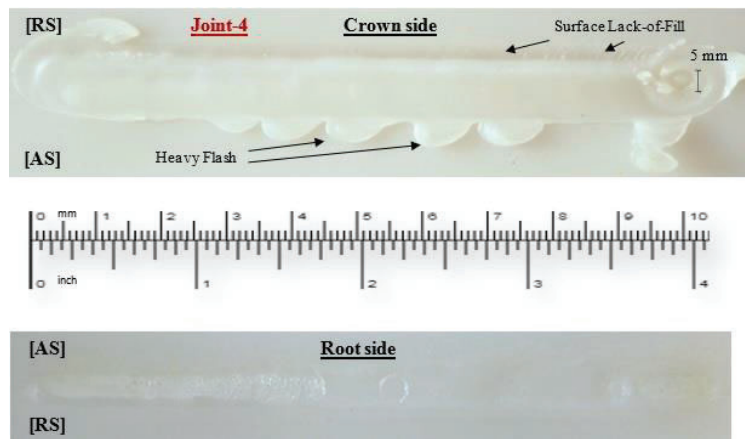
Joint-4 material flow, surface finish, and surface defects
